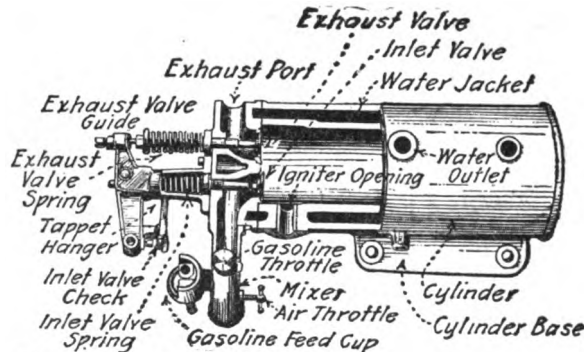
Top view of a gas-engine cylinder, partly cut away to show water jacket and arrangement of valves.
